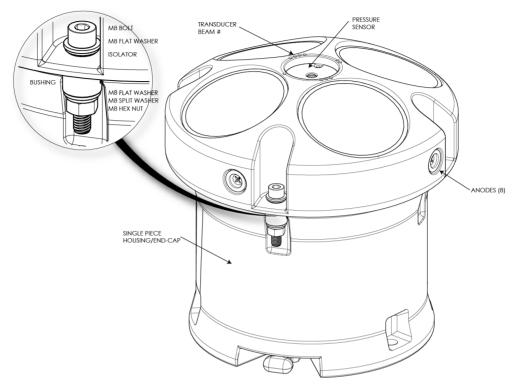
6000 meter WorkHorse Monitor Parts Location
